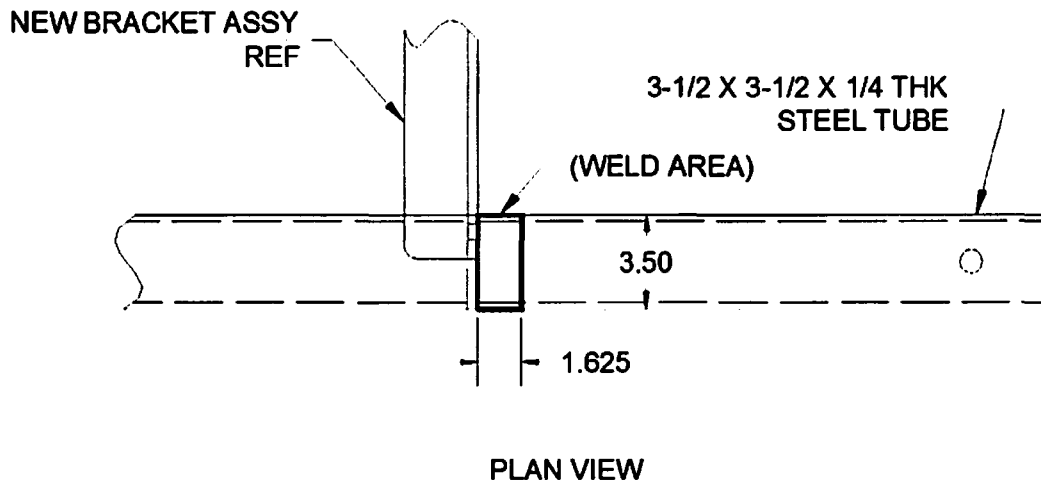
Strength of weld evaluation at underside of rail kit to mounting bracket
